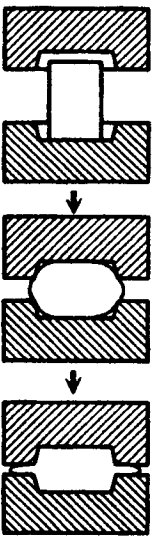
A simple example of impression die forging. Flash cools rapidly, closing off the die to further metal flow. Pressure inside the workpiece then increases to fill the die cavity.
